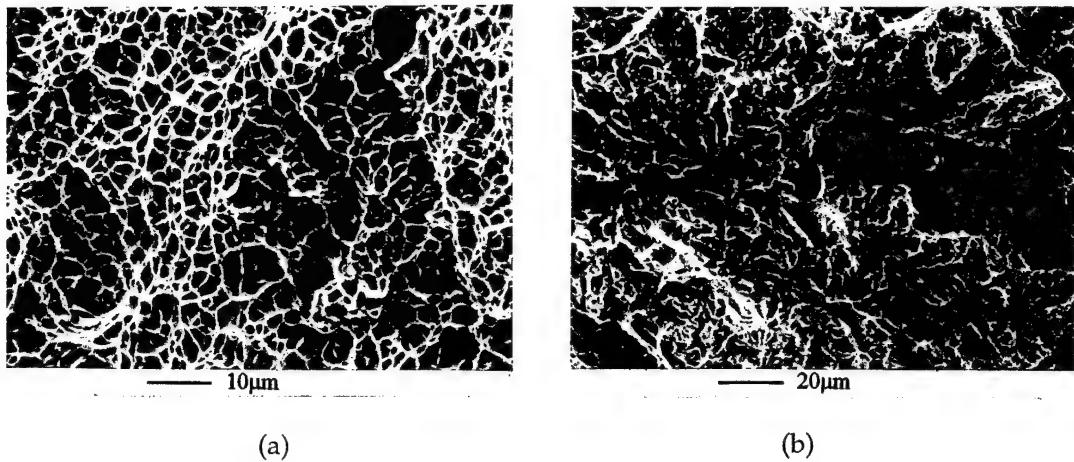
Scanning electron microscopy of Q1N weld metal, notched tensile specimens (a) equi-axed dimples in the fibrous region, 21°C and (b) brittle square fracture showing quasi-cleavage, -101°C.
